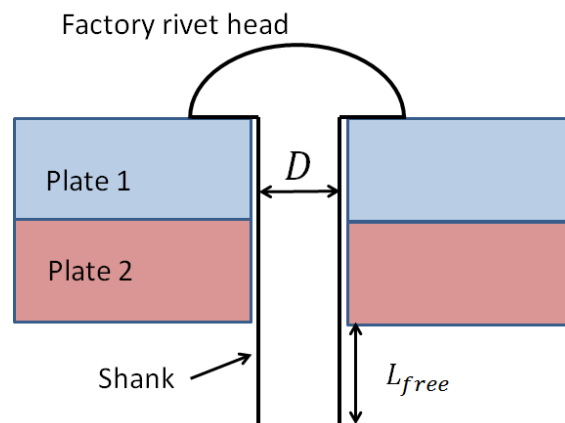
Riveted joint terms before riveting. Step 1 in the riveting process.
